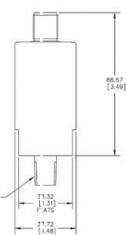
Outline dimensions of the ST5484E-SW Flying Lead Version. Dimensions in mm [inches]. 8200-000 IEC conduit elbow shown installed, necessary for Explosion Proof rating.
